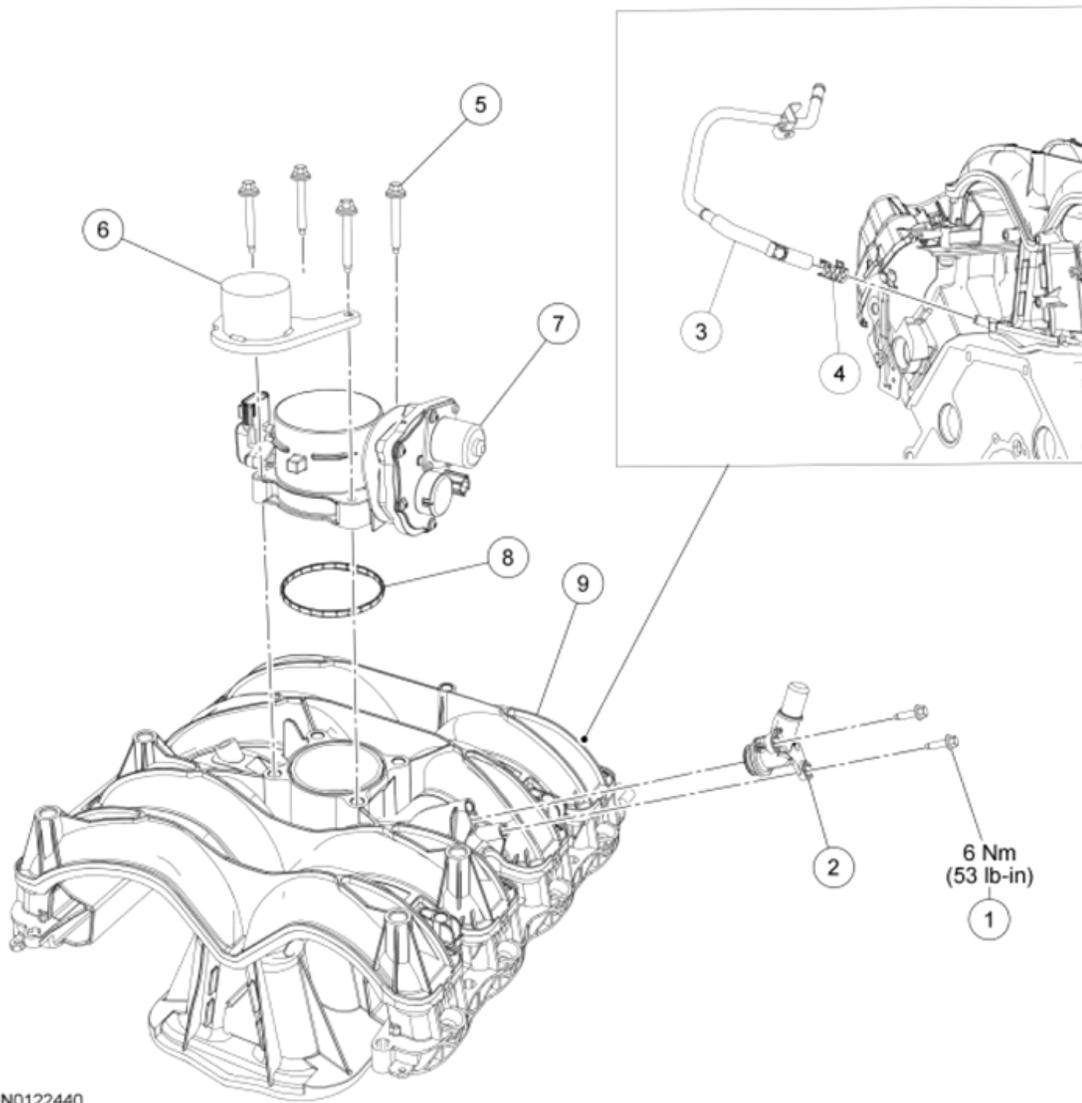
Exploded View Of Intake Manifold Vacuum Tube, Throttle Body (TB) And Intake Manifold With Torque Specifications
